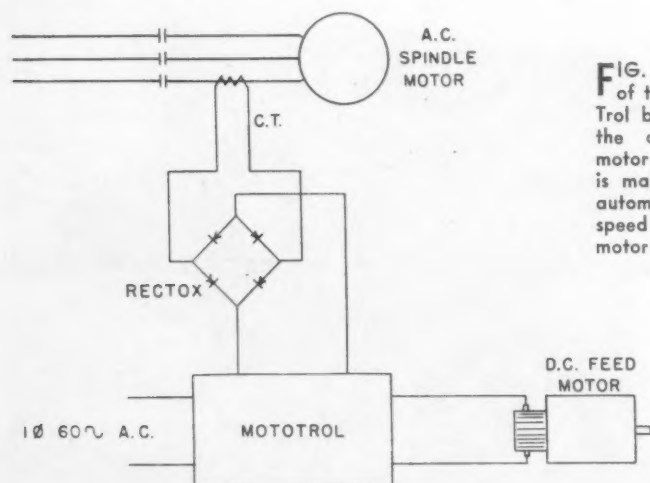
New application of the electronic Mot-O-Trol by which the load on the a.c. spindle driving motor of a milling machine is maintained constant by automatically varying the speed of the d.c. feed motor in step with driving motor current.
